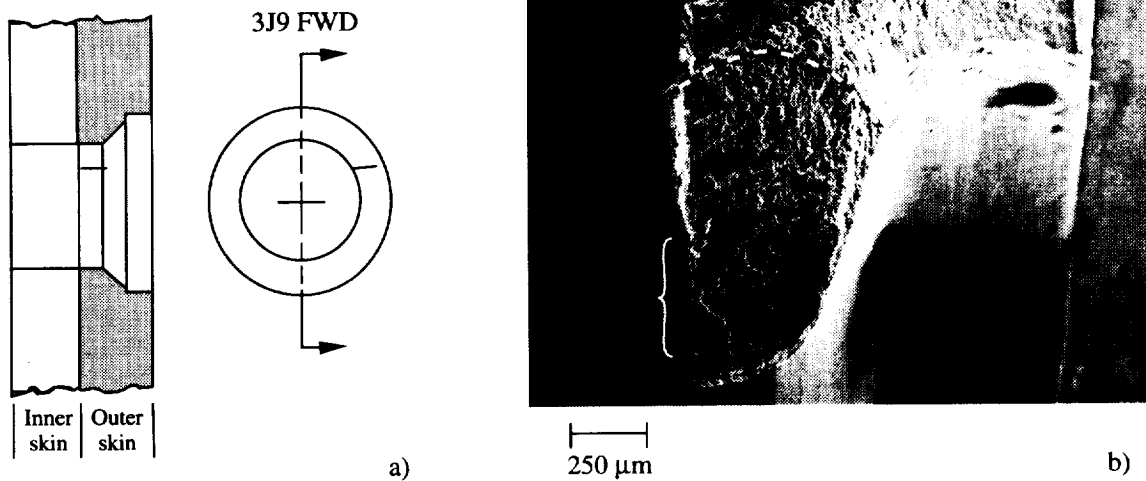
a) The schematic shows the rivet hole 3J9 configuration and the location of the outer skin fatigue crack oriented in the forward direction and about the 2 o'clock position. b) The SEM micrograph shows the fatigue crack at the rivet hole (bottom). The bracket shows the likely crack initiation region along the faying surface and the dashed line marks the fatigue crack front.
